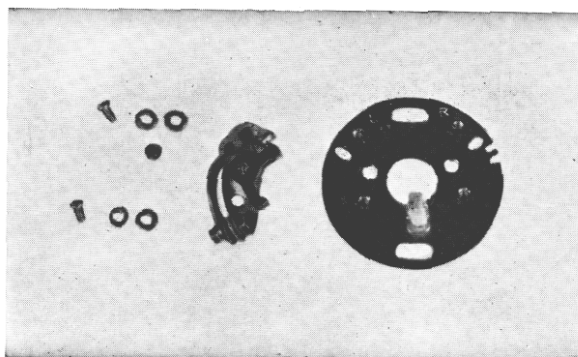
Contact breaker of Model C72, 77, and Model CB72, 77-11 type
